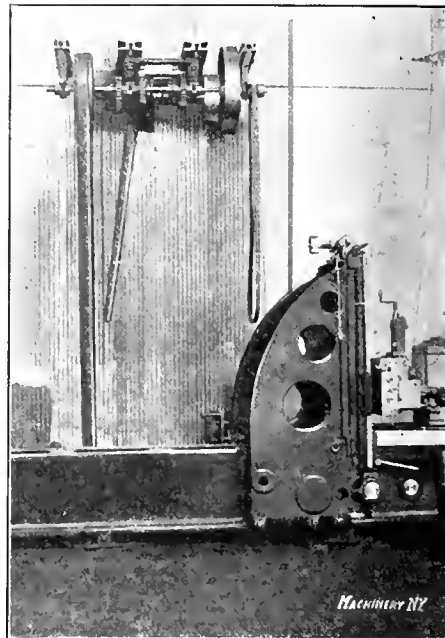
Flaner equipped with a Lodge & Shipley Variable-speed Lathe Countershaft
